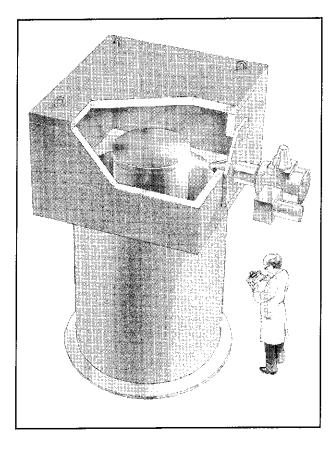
Electron beam welding of copper lid on copper cylinder.
